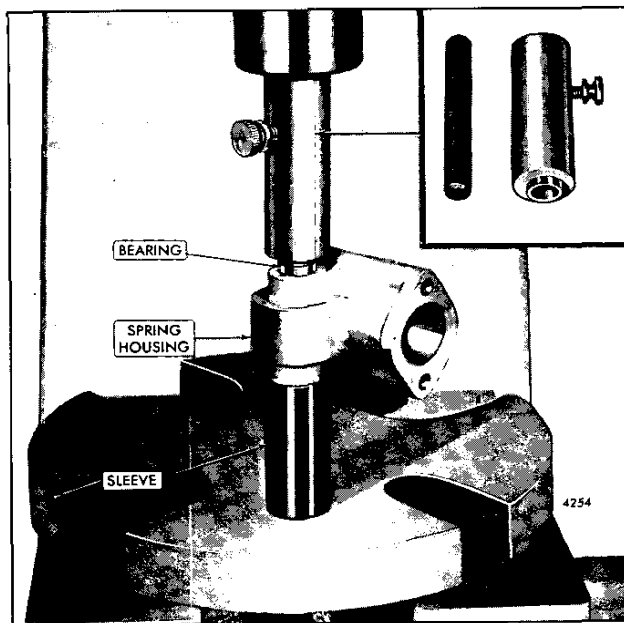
Installing Speed Control Shaft Bearings In Spring Housing Using Tool J 9196
